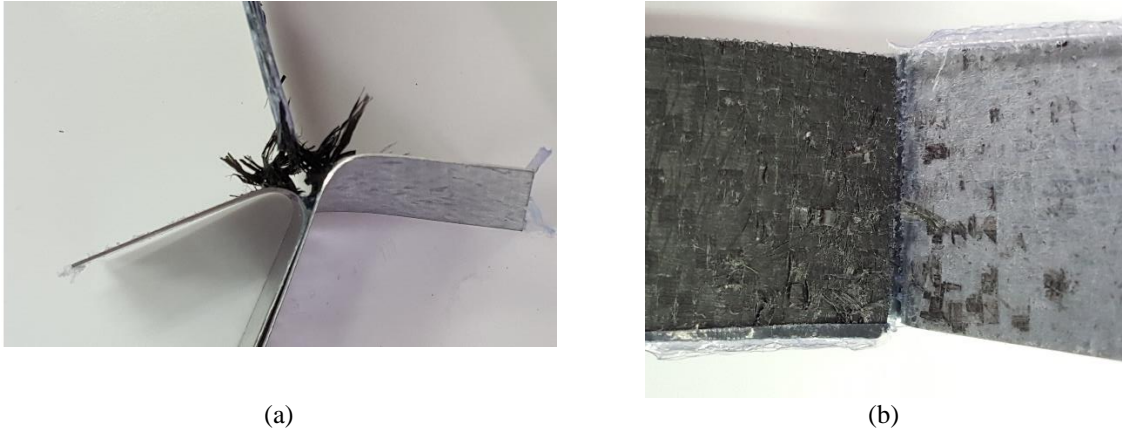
Examples of failed lap shear test specimens, with layers peeled apart and bent to show damaged surfaces.
